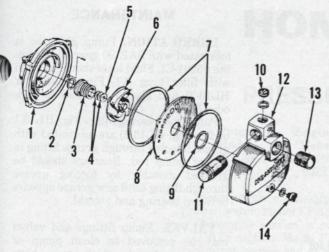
Exploded view of Model 120S3-1 and 120S3-1A centrifugal pumps. Refer to Fig. HL12-1 for parts identification.
